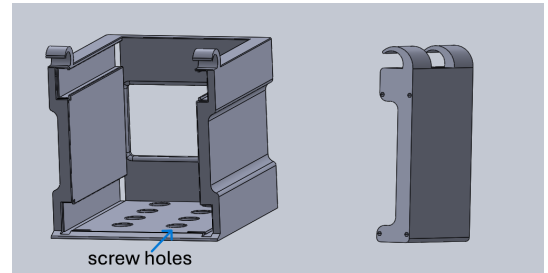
CAD models of Backplate with screw holes shown (left) and Footplate (right), before attachment and inclusion of wheels and other components.
